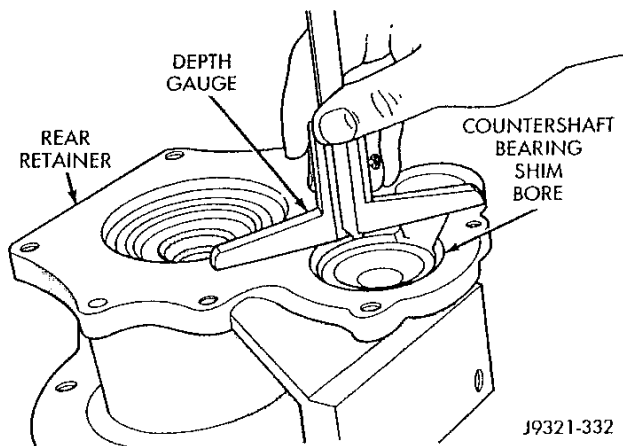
Measuring Depth Of Countershaft Bearing Shim Bore (In Rear Retainer)
